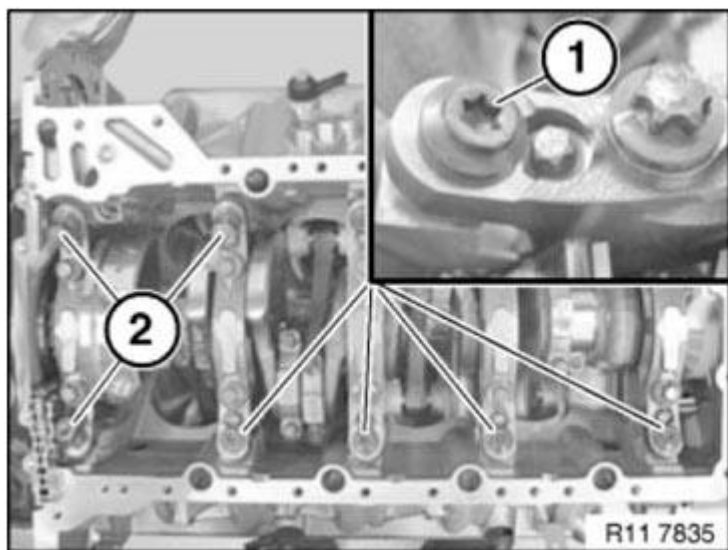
Identifying Main Bearing Taper Screw Connection And Oil Pump Spacer Pins
